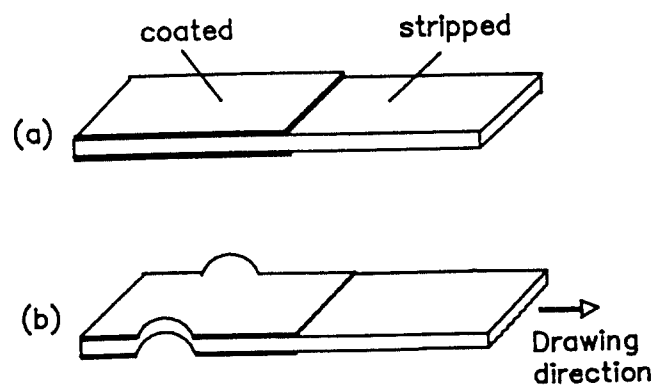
Specimen shape stripped off the half part of the coating layer at as-received coated specimen in longitudinal direction (a) before test, (b) after test
